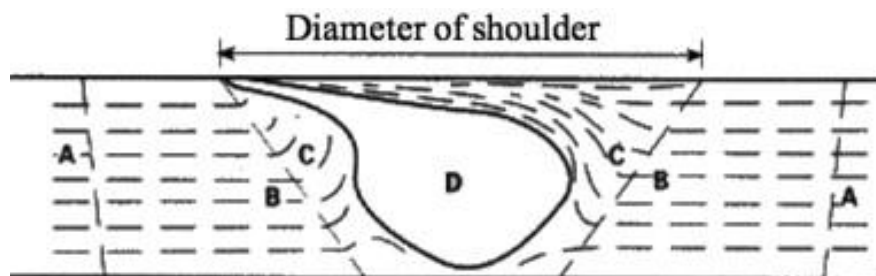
Schematic cross-section of a typical FSW weld showing four distinct zones: (A) base metal, (B) heat-affected, (C) thermo-mechanically affected and (D) stirred (nugget) zone. [39]
